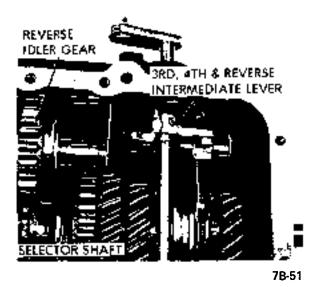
1 Position of Third, Fourth, and Reverse Intermediate Lever on Selector Shaft
